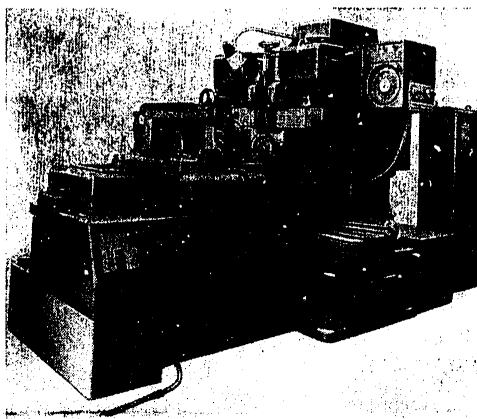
Model 5851Ts universal gear grinding machine with digital programmed control.
